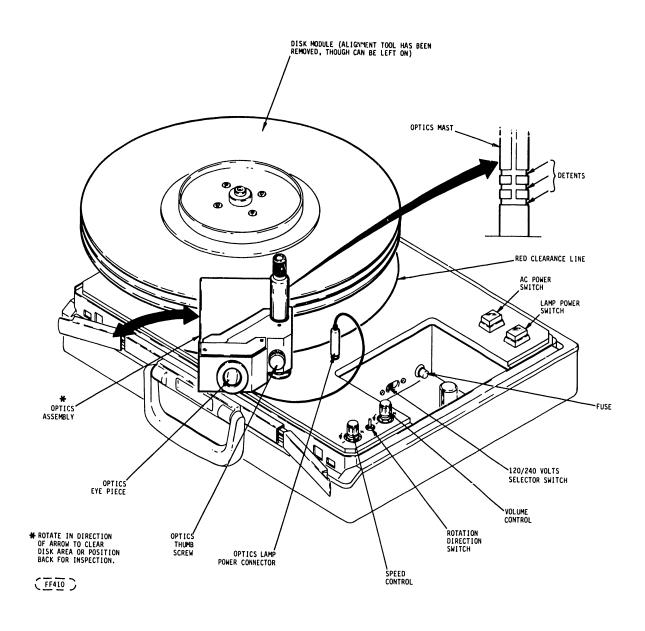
FIXED MODULE INSPECTOR WITH MODULE INSTALLED FOR INSPECTION
